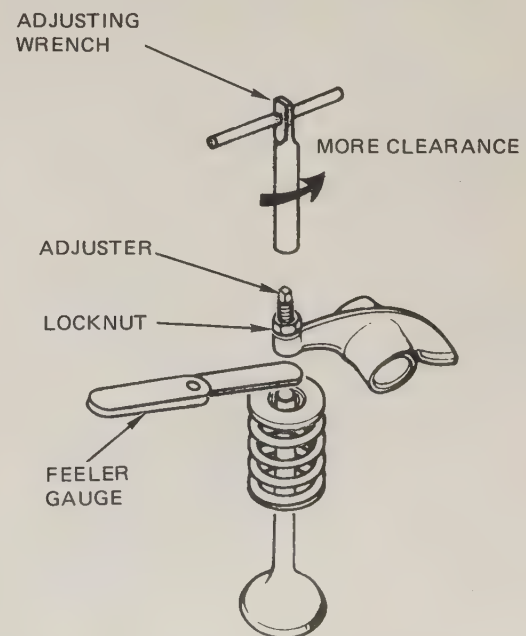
Adjusting valve clearance on an overhead-camshaft engine that has rocker arms. (Honda Motor Company, Ltd.)
